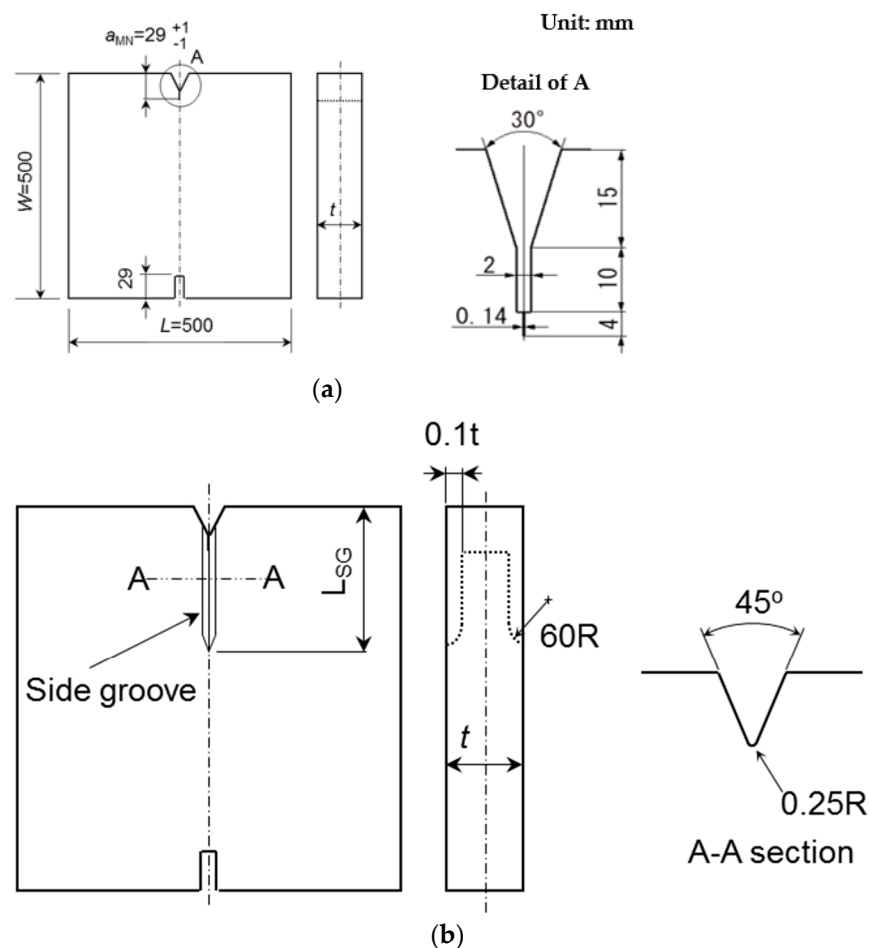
Geometry of the brittle crack arrest test specimen and side groove shape. (a) Standard test specimen shape; (b) side groove shape.
